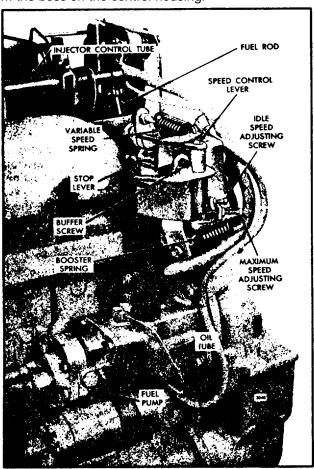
Variable Speed Open Linkage Governor Mounted on Engine
